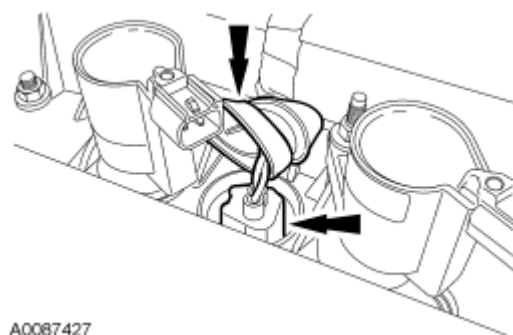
Locating Cylinder Head Temperature Sensor Electrical Connector And Rubber Boot
